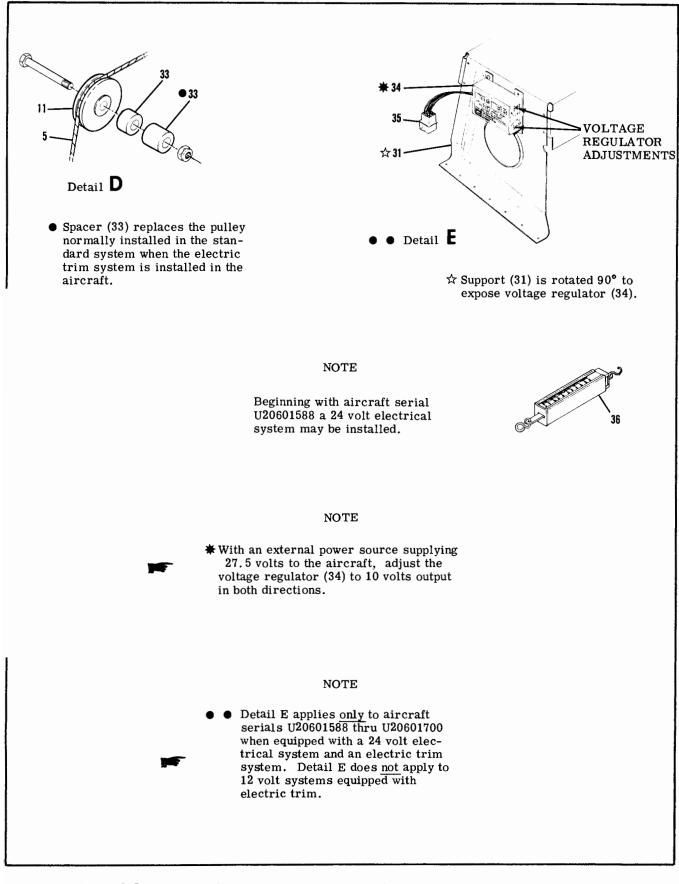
Electric Elevator Trim System thru P20600648 & U20601700 (Sheet 2 of 2)
